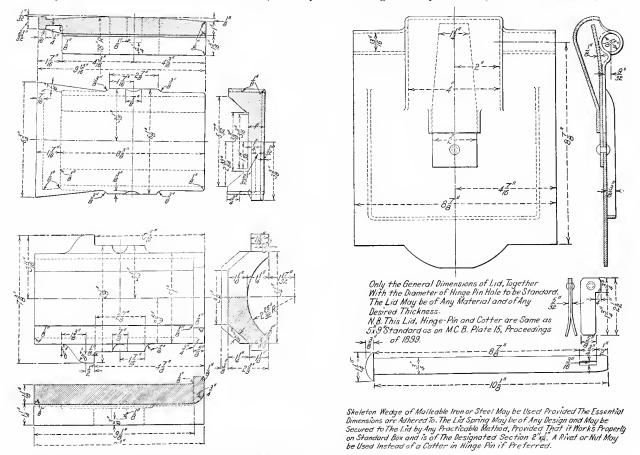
M. C. B. Standard Bearing, Wedge and Journal Box Lid for 5½ in. by 10 in. Journal. (M. C. B. Sheet 12.)
